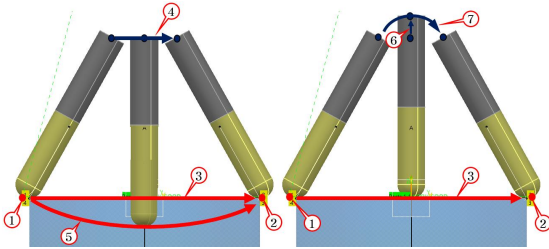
Implementation of post-processor for 5-axis machining of molds
